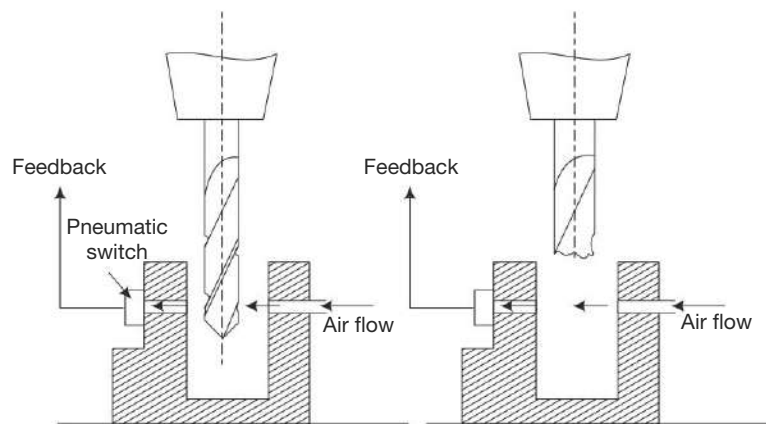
Typical system for tool breakage monitoring using compressed air at a fixed position probe in a machining centre
